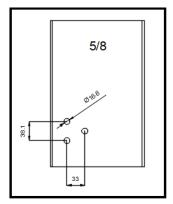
the dimensional for 16.6mm diameter of tube. [5]
